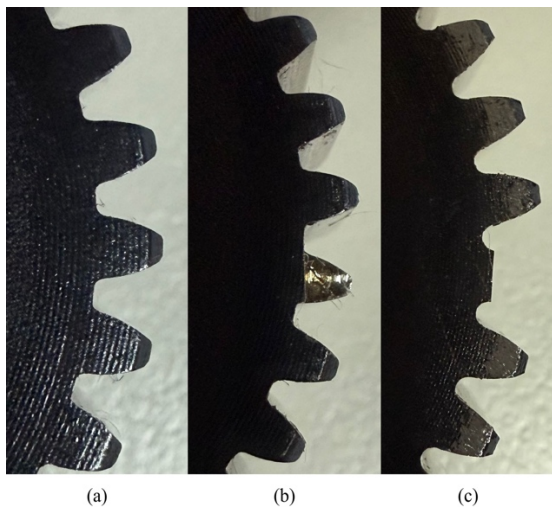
Spur gear tooth cut (a) normal gear (b) 2 mm tooth cut gear (c) full tooth cut gear.
